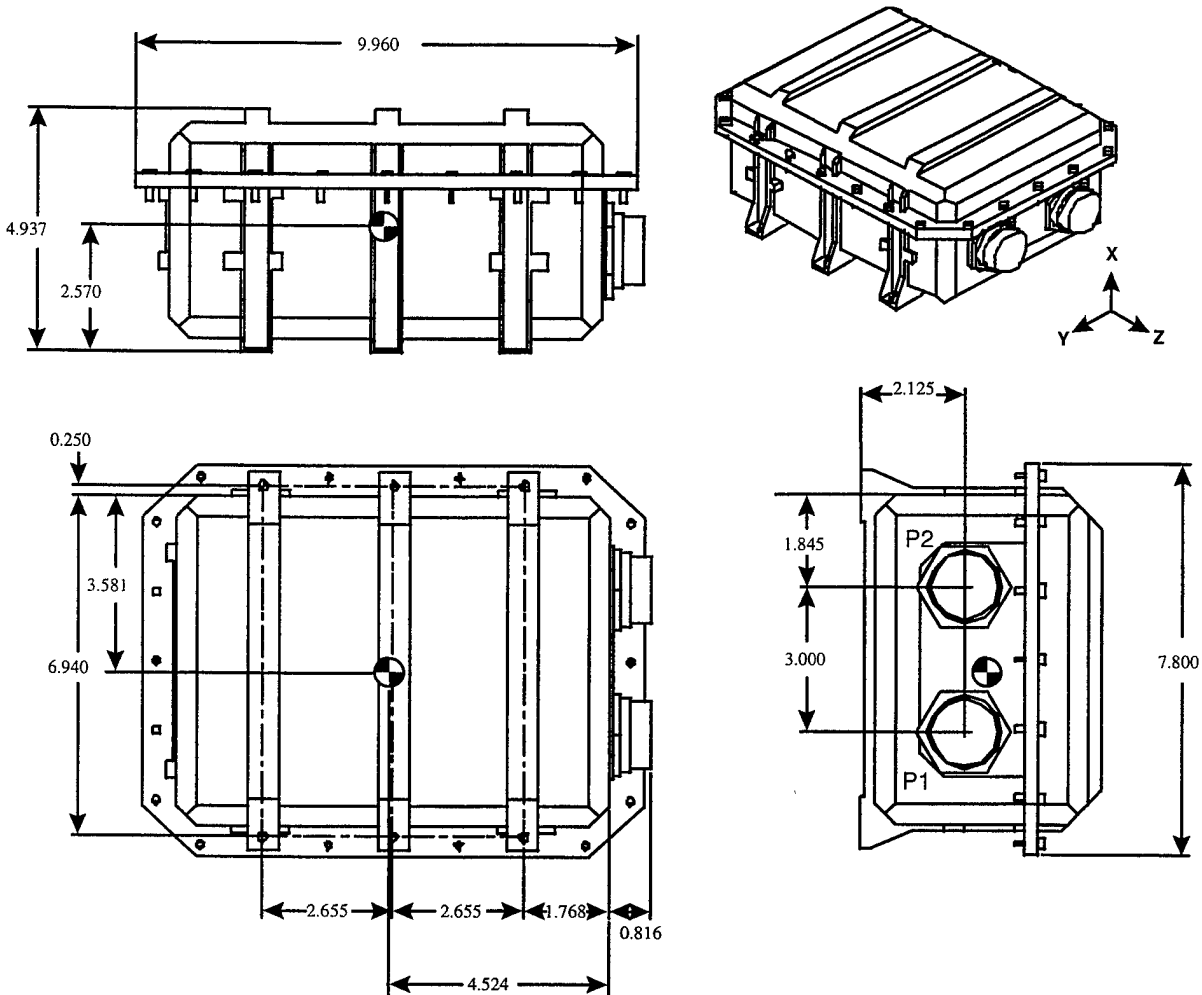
Mechanical Dimensioning of the EDMM Unit
